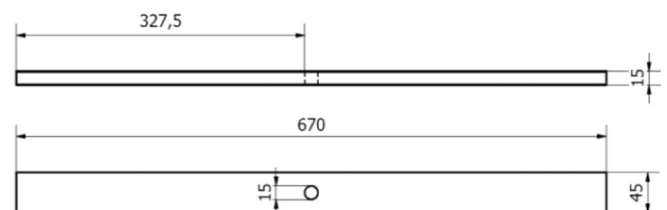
Drawing of the 15 mm thick specimens (dimensions in mm).
